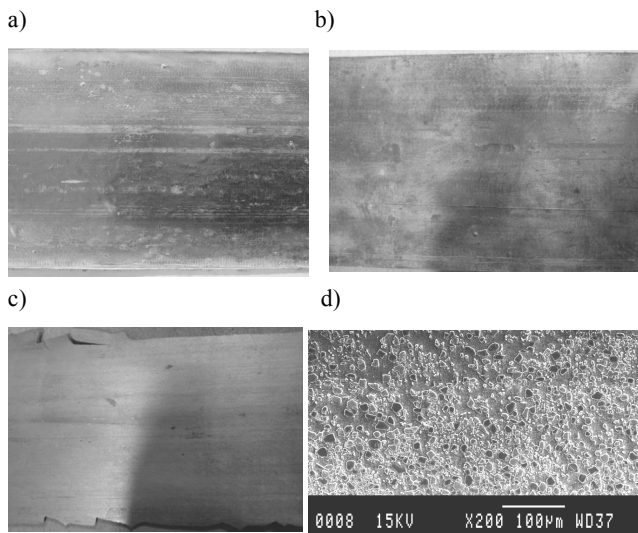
Surface and dispersion of SiC_p of the roll cast Al-30vol% SiC_p strip at the speed of 60m/min. Thickness was 1.7mm. (a) surface of as-cast strip, (b) surface of hot rolled strip at 500°C, thickness: 1.5mm, (c) surface of cold rolled strip after hot rolling, (d) SEM image of the cross section of as-cast strip showing the dispersion of SiC_p
